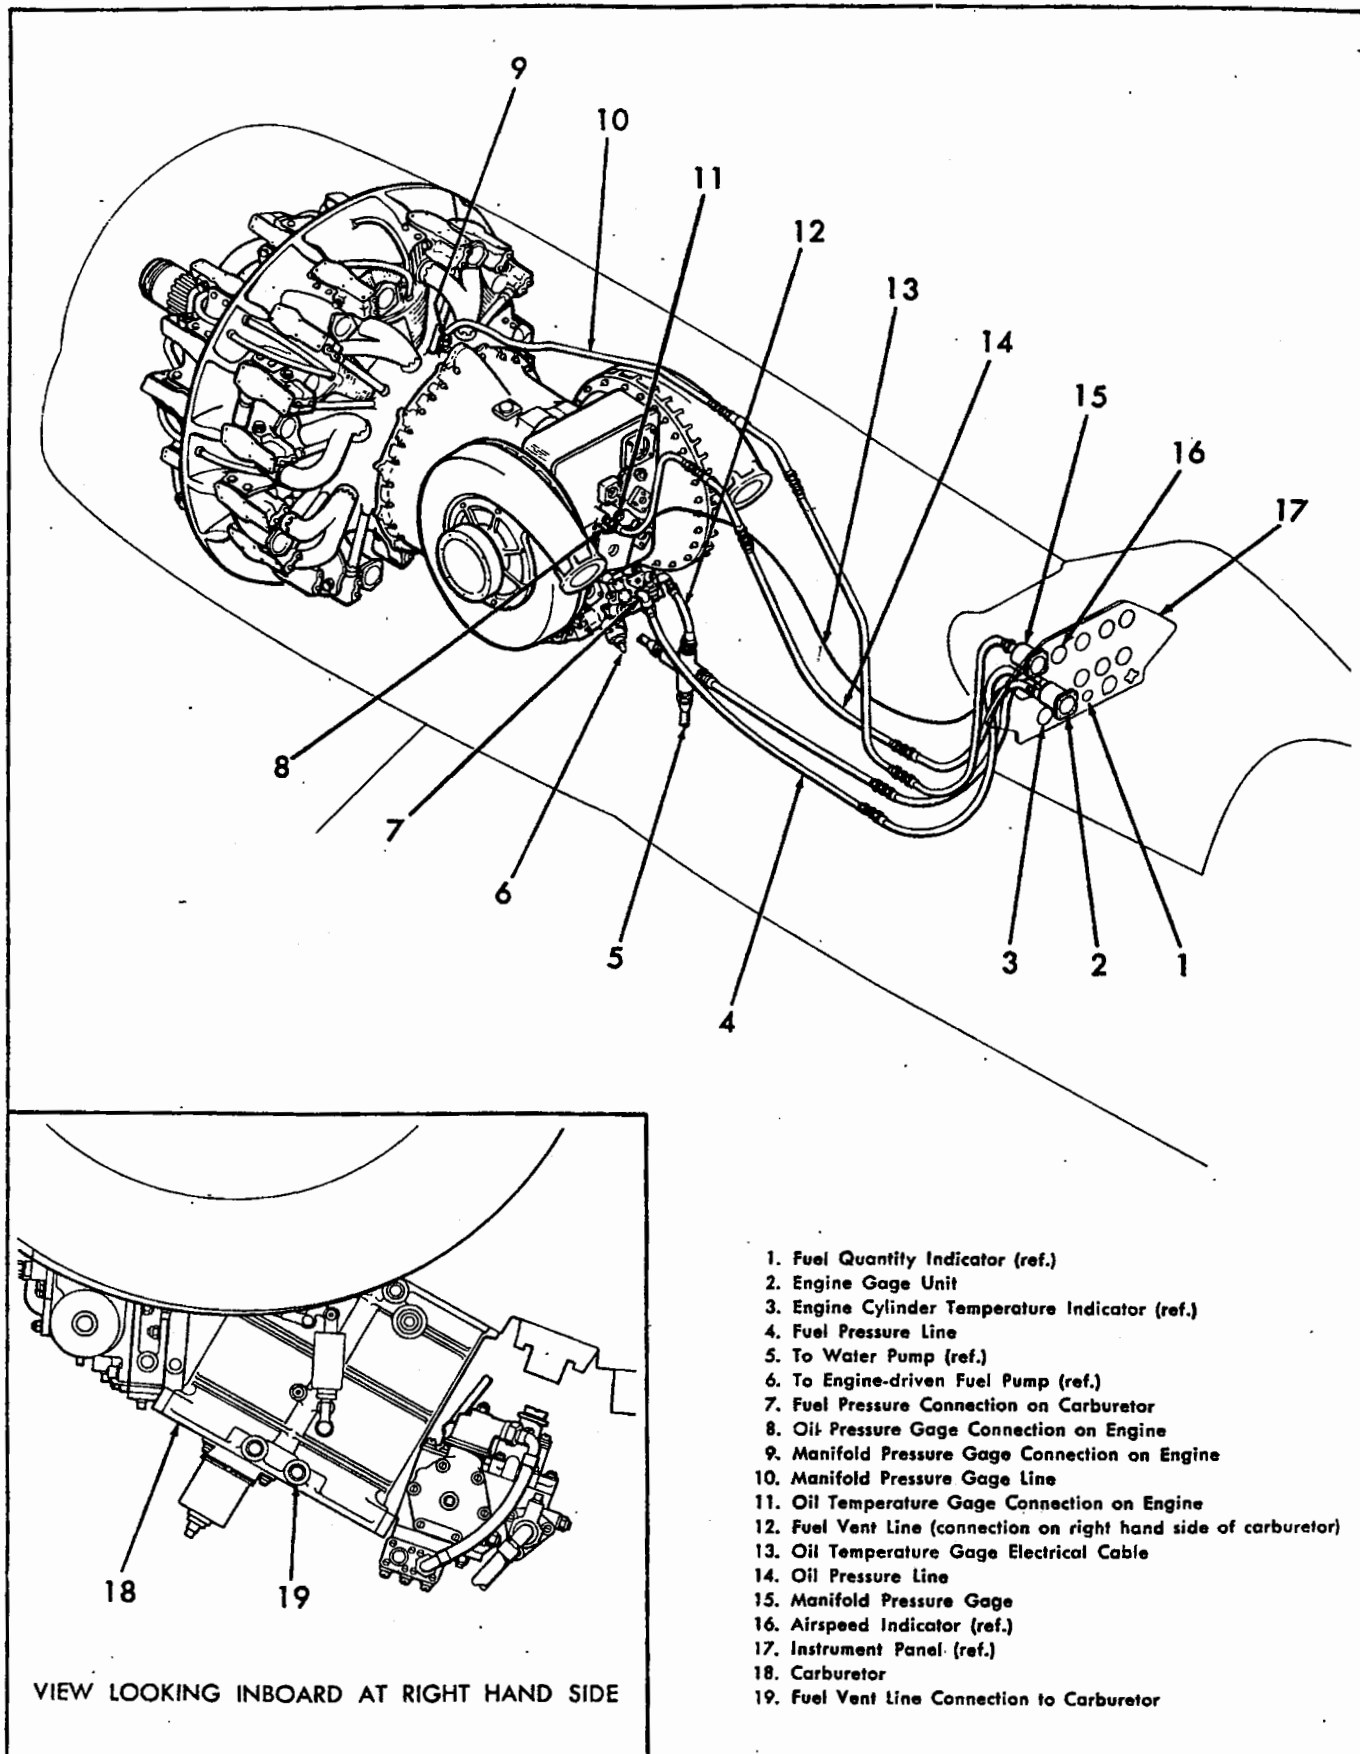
Engine Gage Unit and Manifold Pressure Gage Installations.
